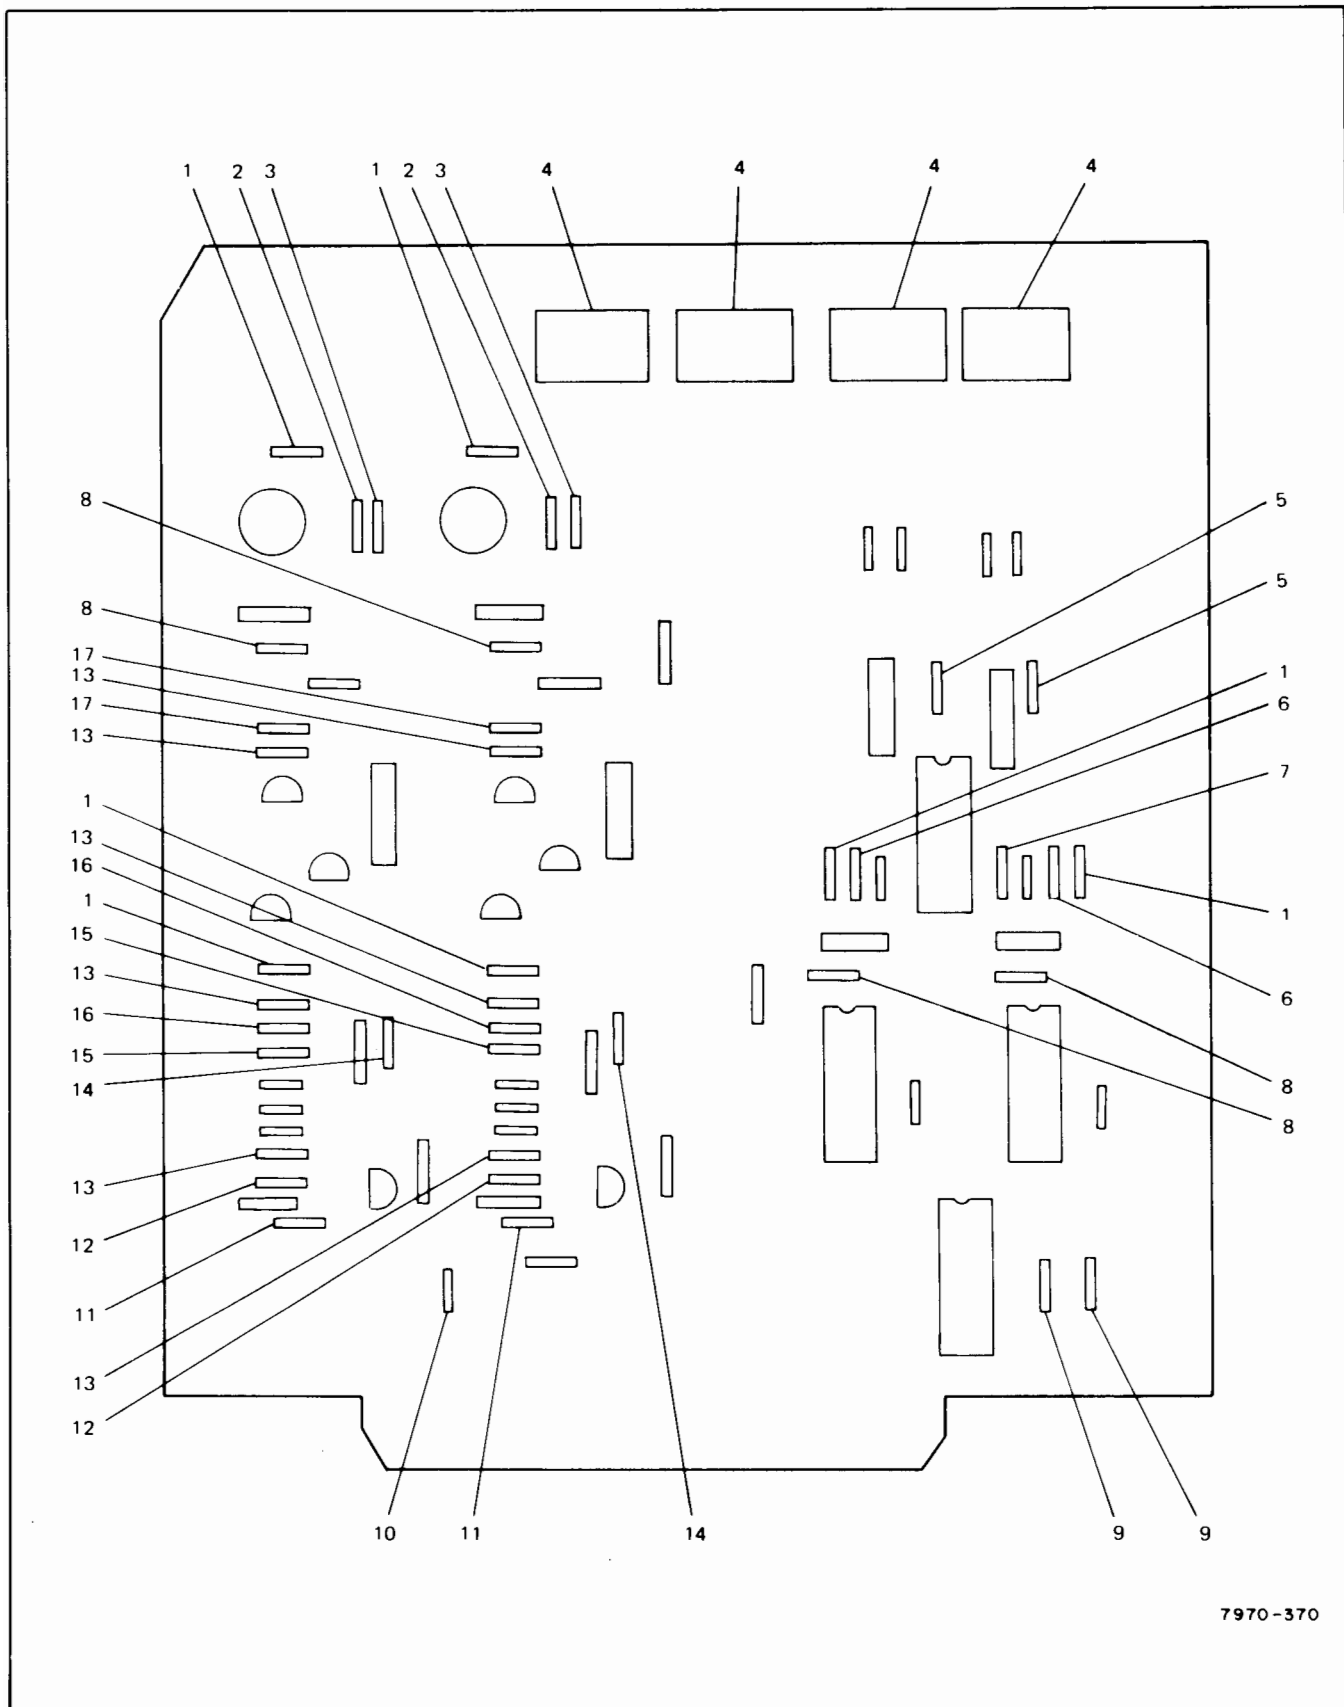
Single-Channel Read Data PC Assembly (21 - 45 IPS)
